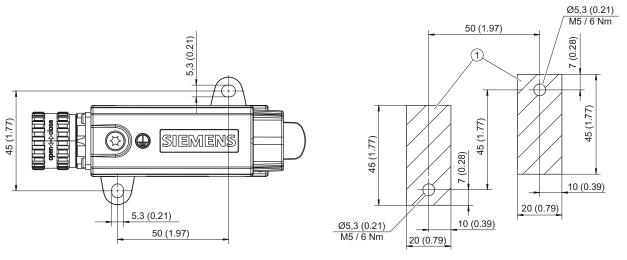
Dimension drawing of the Sensor Module External SME25, all data in mm and (inches)
